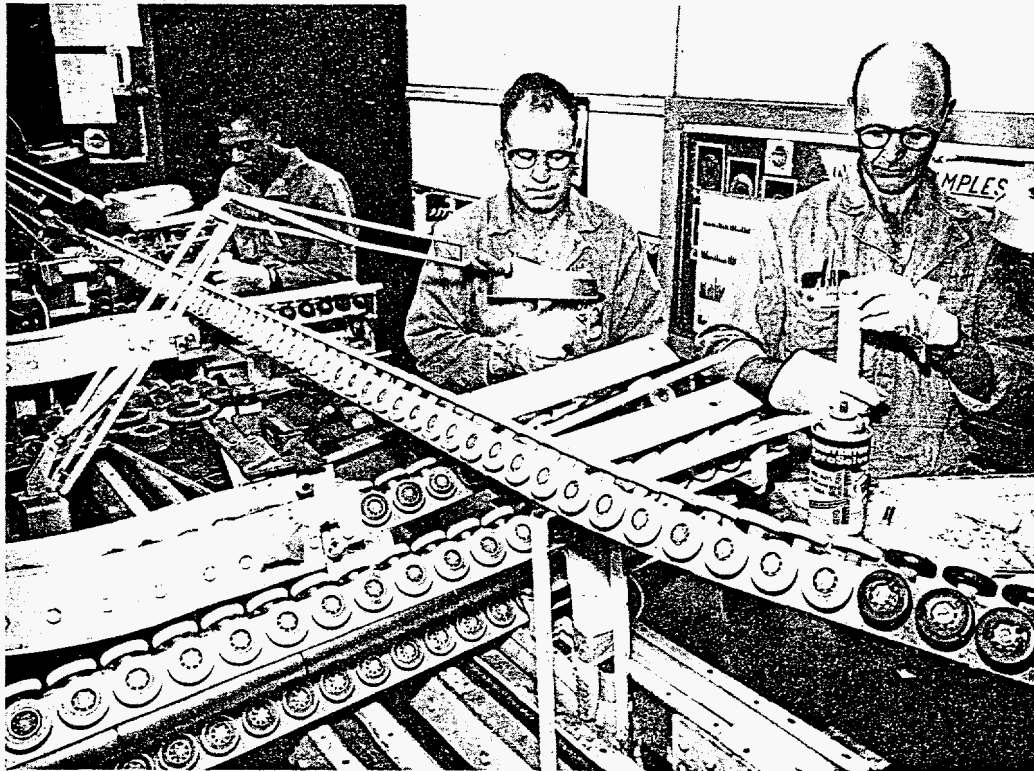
Inspection of Closure Welds (AlSi Process)
